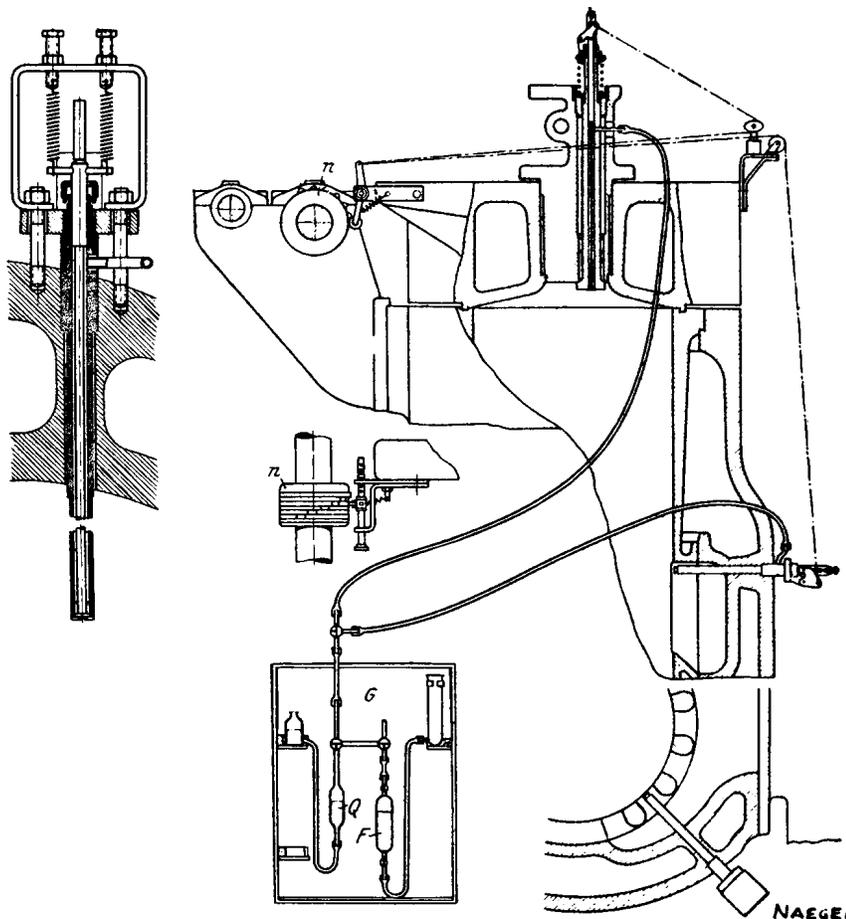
Test Arrangement with Details for Taking Gas Samples from a Sulzer Engine. (Naegel, A., "Dieselmaschine der Gegenwart" *VDI Zeitschr.*, 67, 733, 1923.)
